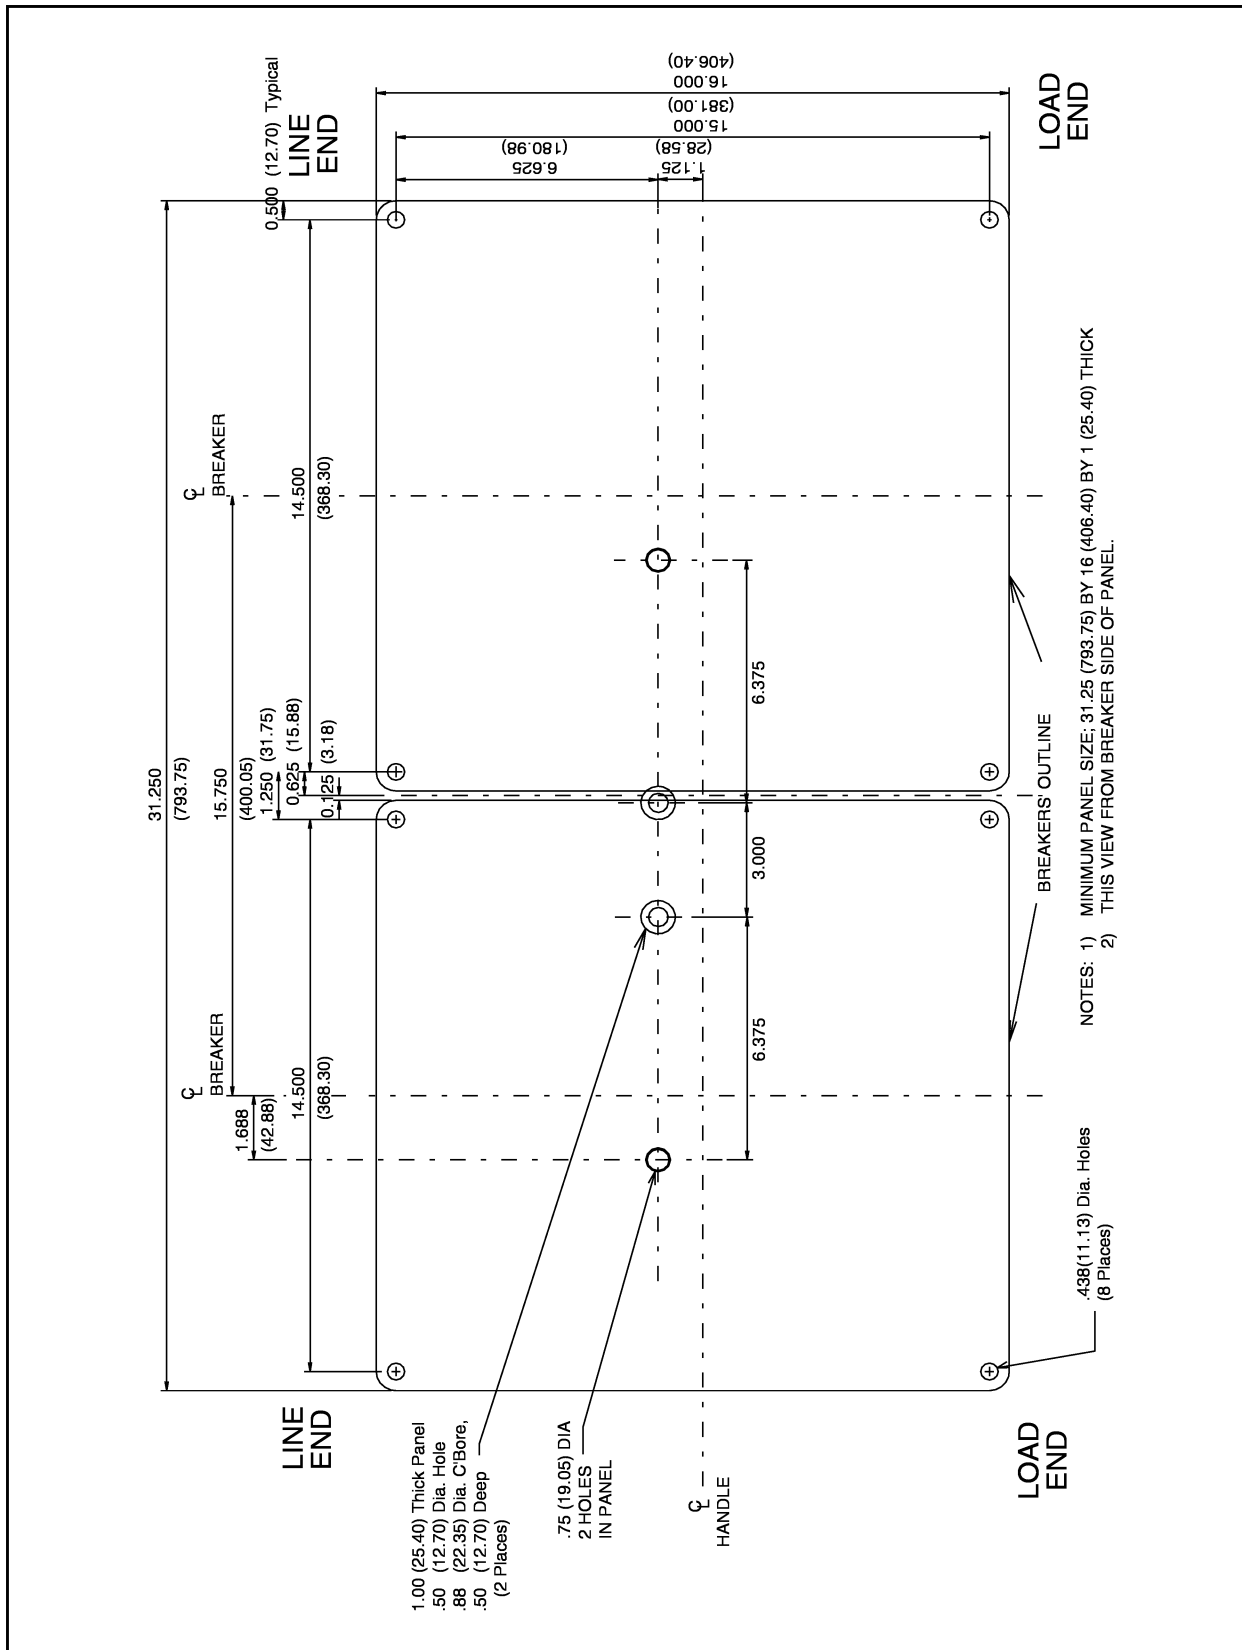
R-Frame 3-Pole Circuit Breaker Mounting Panel Hole Sizes and Dimensions, Viewed from Breaker Side of Panel.
